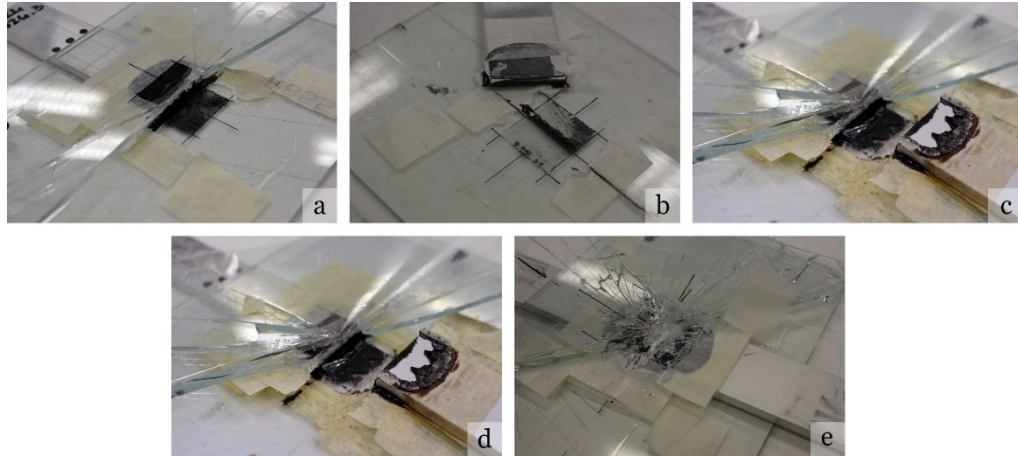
Failure modes of single lap adhesive joints: a) AF failure; b) CF failure; c) SB failure; d) MF failure; e) GD failure.
